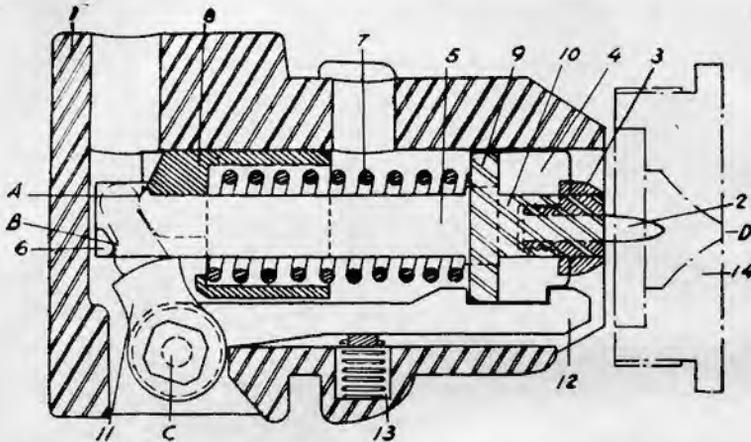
Continuous pull firing mechanism, new type (top elevation).
